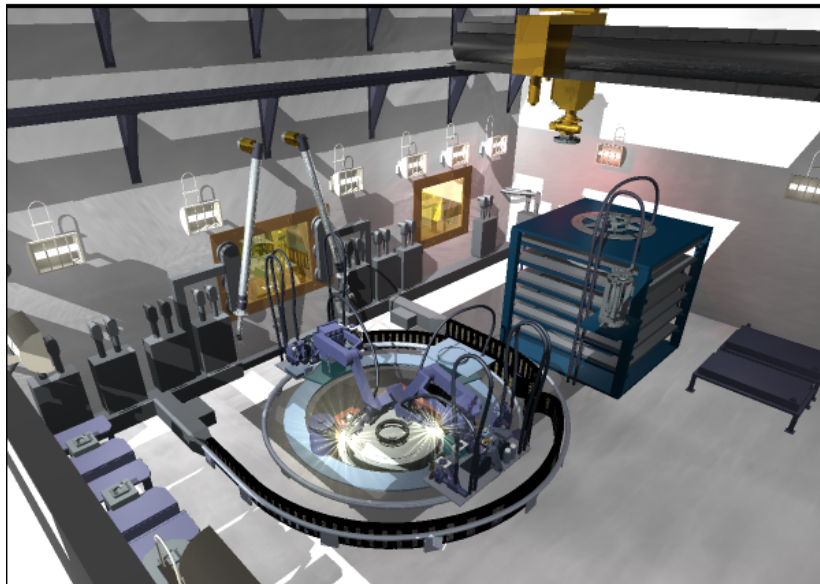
An illustration of the Yucca Mountain Waste Package Closure System welding a waste package lid in place.
